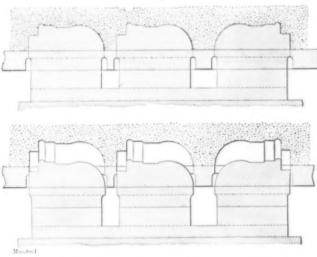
STRIPPING PLATE METHOD OF DRAWING PATTERNS.
